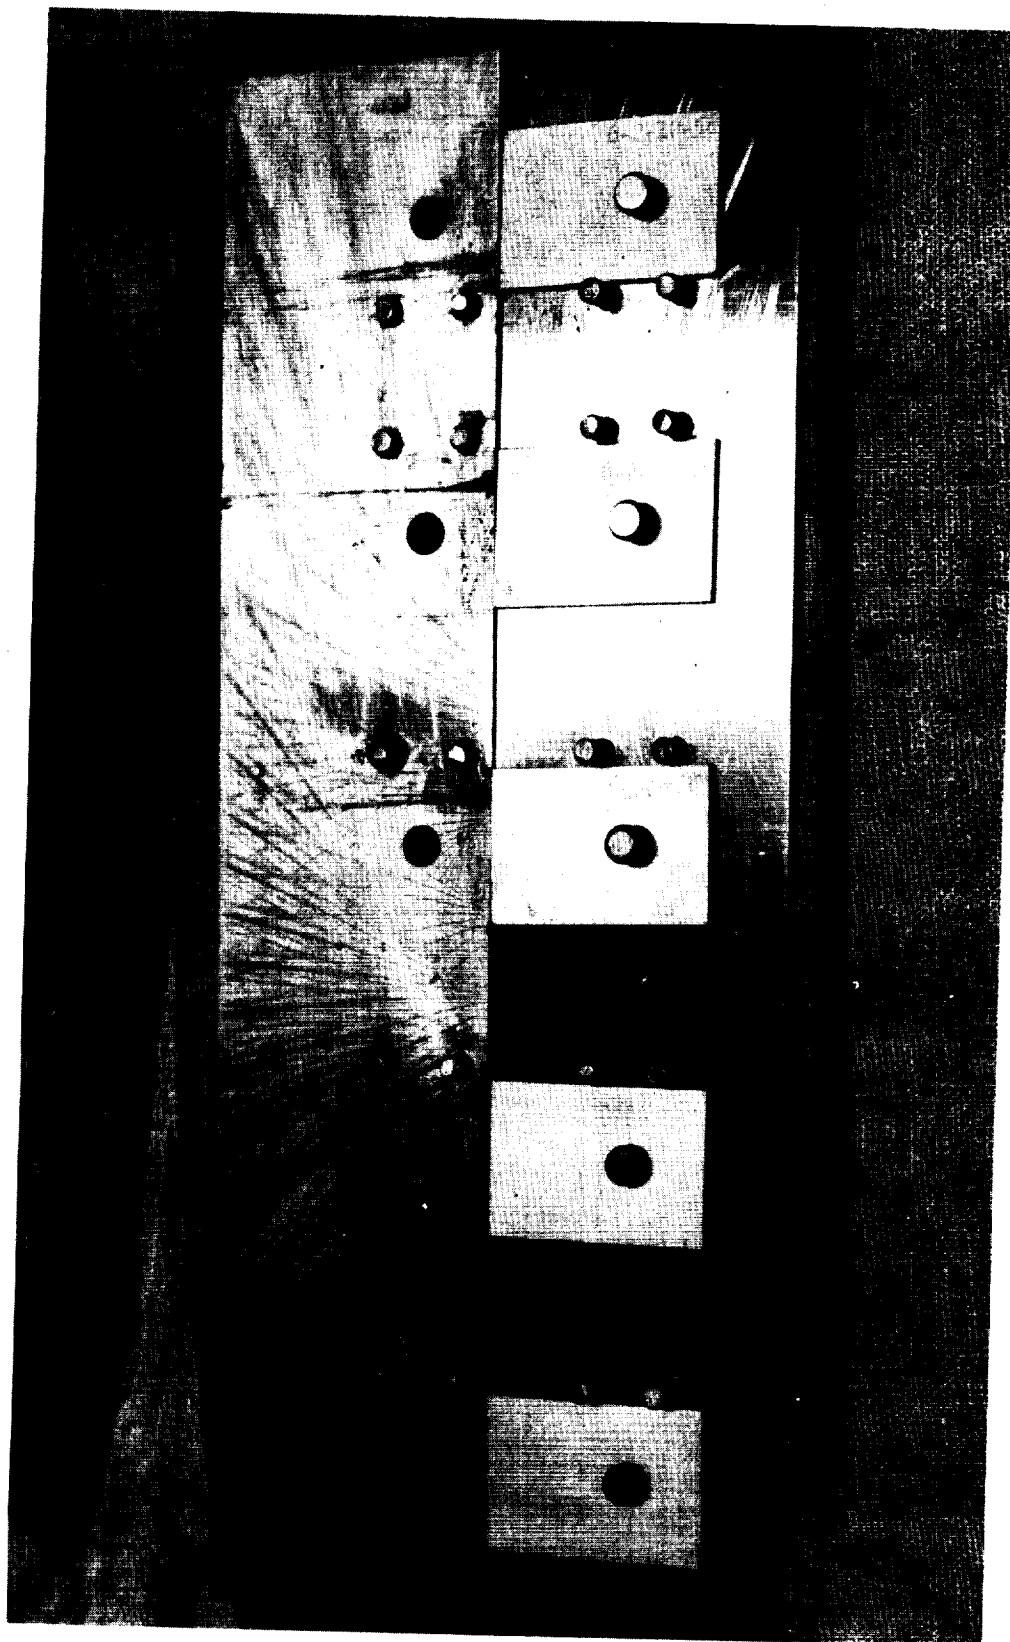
FIRST STEP IN THE ASSEMBLY OF ADHESIVE BONDED TEST SPECIMENS
